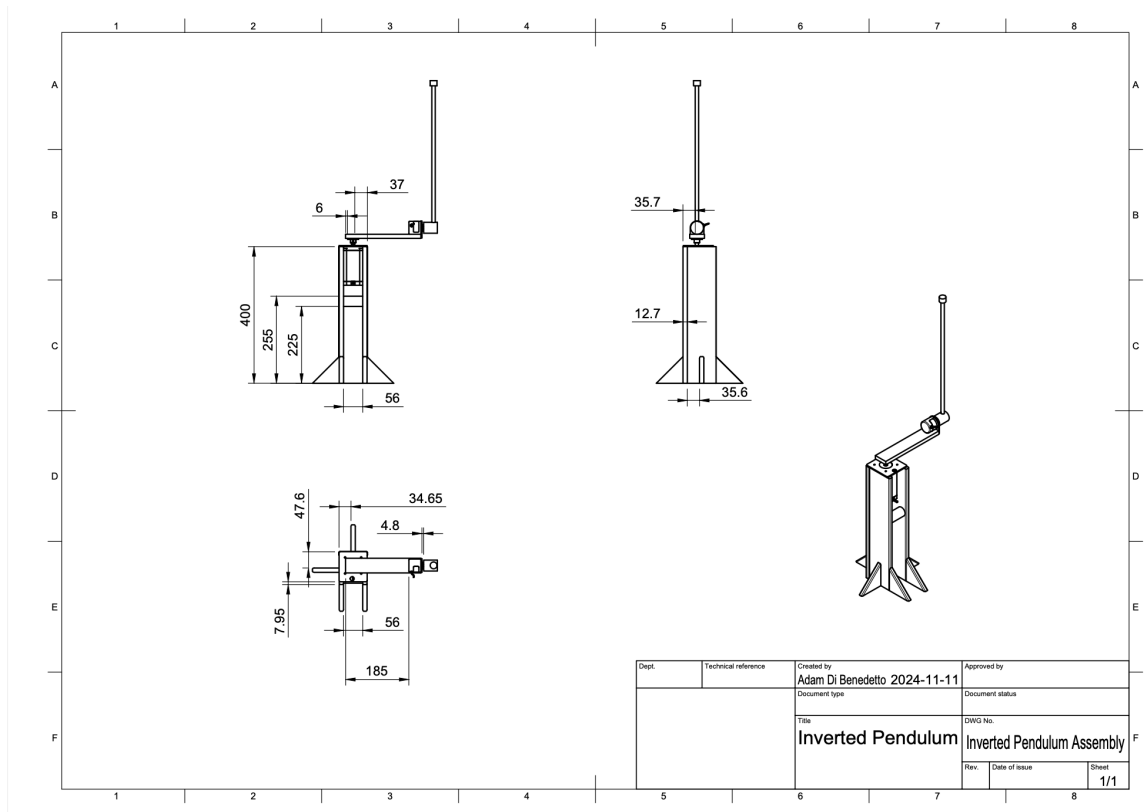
Fusion 360 Drawing of Inverted Pendulum Assembly Drawing
